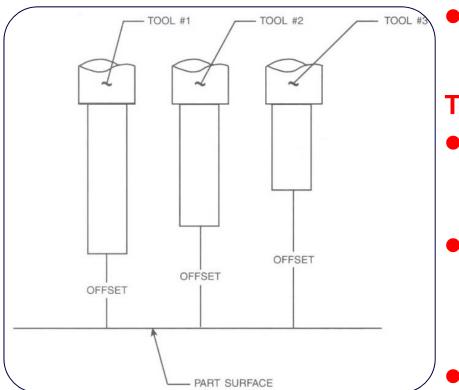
Tool length offset, difference of gage tool trim method
